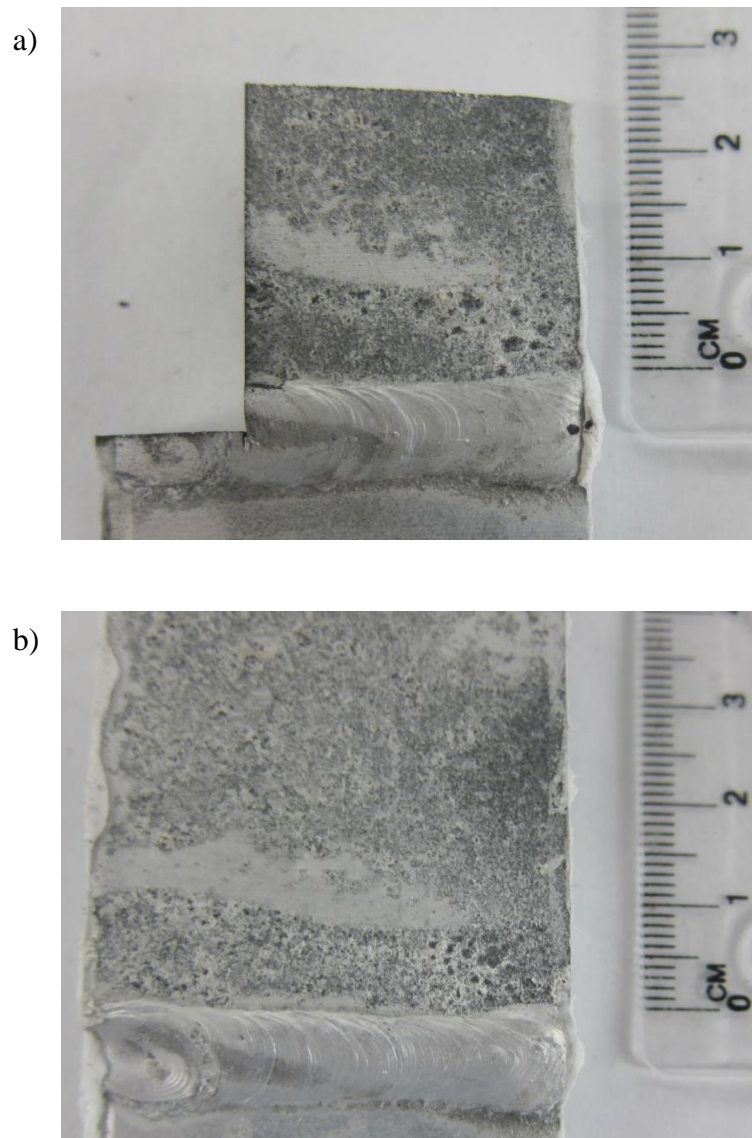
Close-up images of duplicate samples of lap-joint welded configuration G3 (ER5356/AA7003/≡) in the as-welded T6+PB condition. Sample G3-2 was cross-sectioned prior to being photographed.
